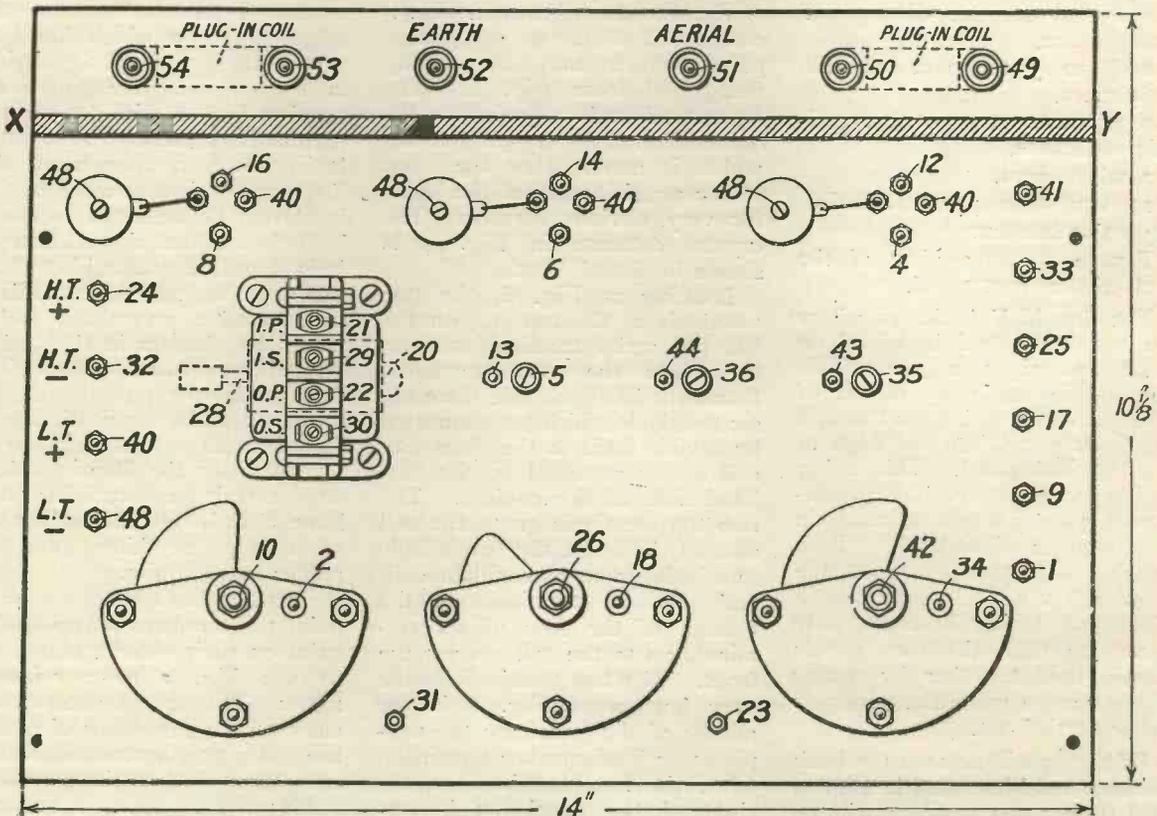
A back view of the front panel, showing position of terminal board XY.
